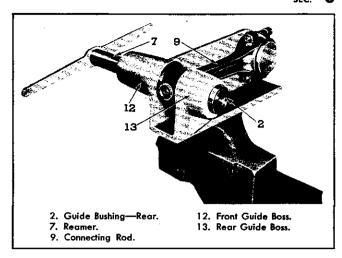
Reaming Piston Pin Bushings in Connecting Rod with Tool J-1686.
